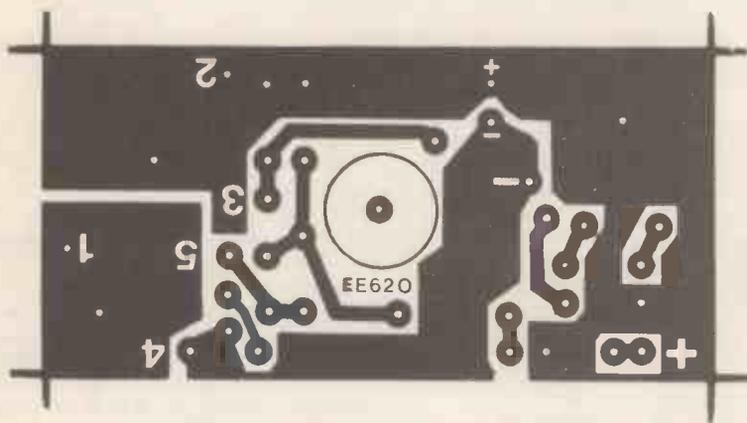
Full size copper foil master pattern for the EPROM Eraser p.c.b.
